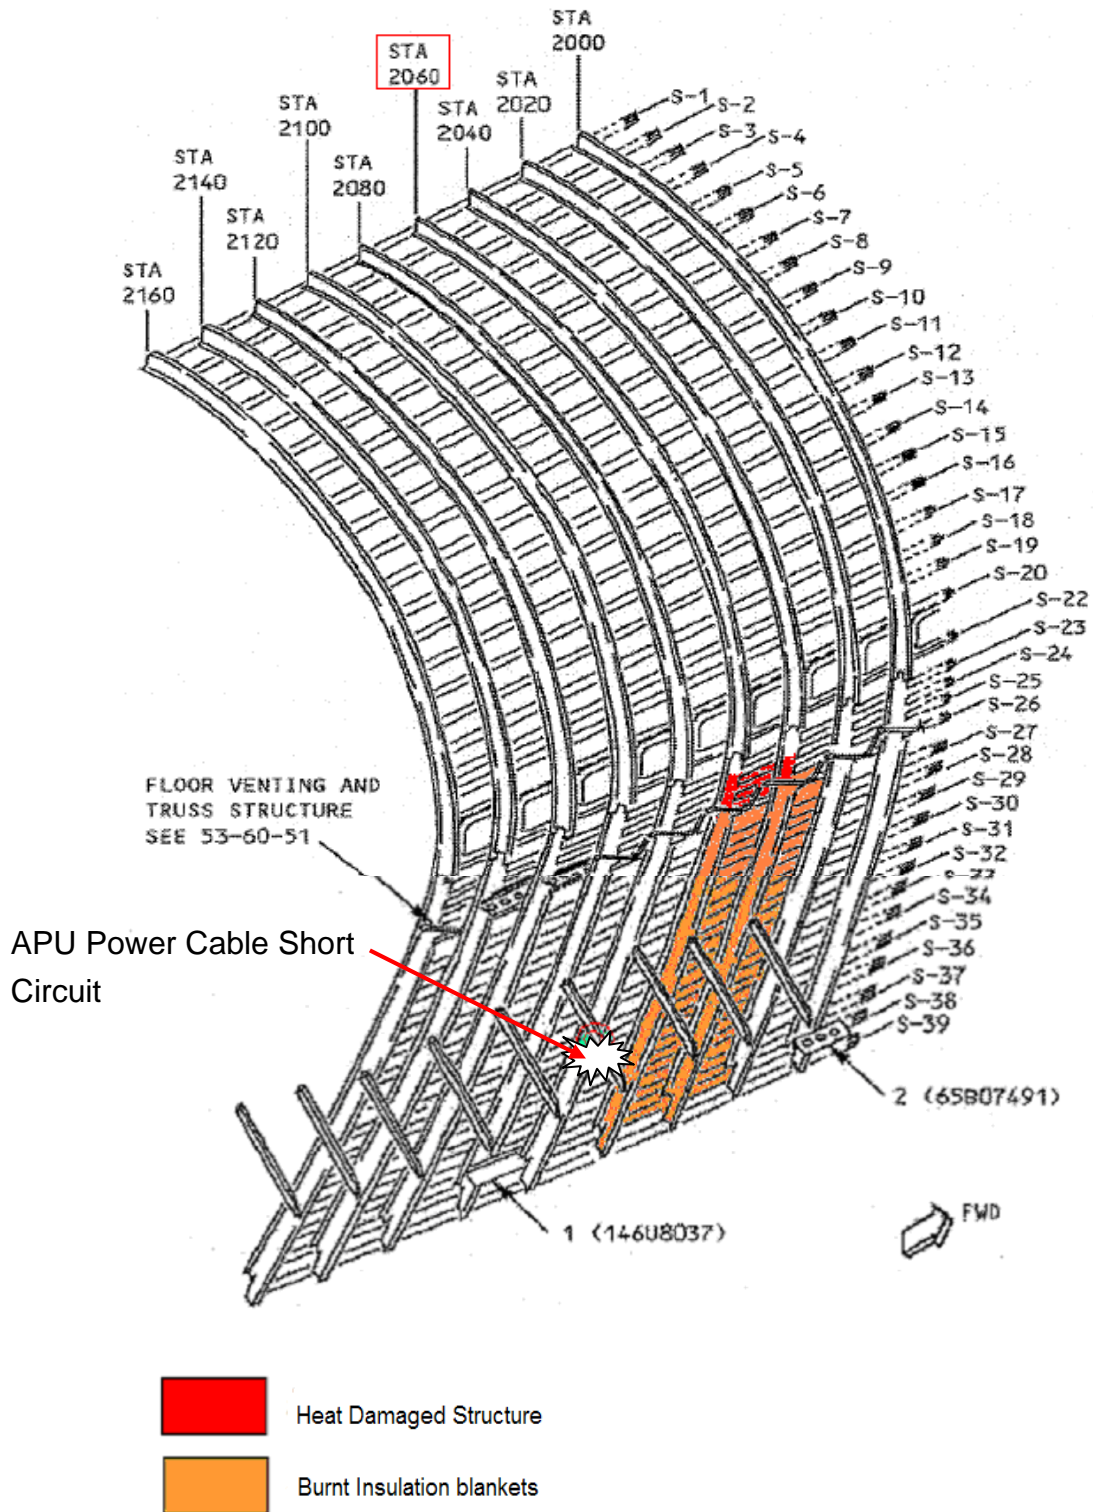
Location of Heat Damaged Structure and Damaged insulation Blankets
